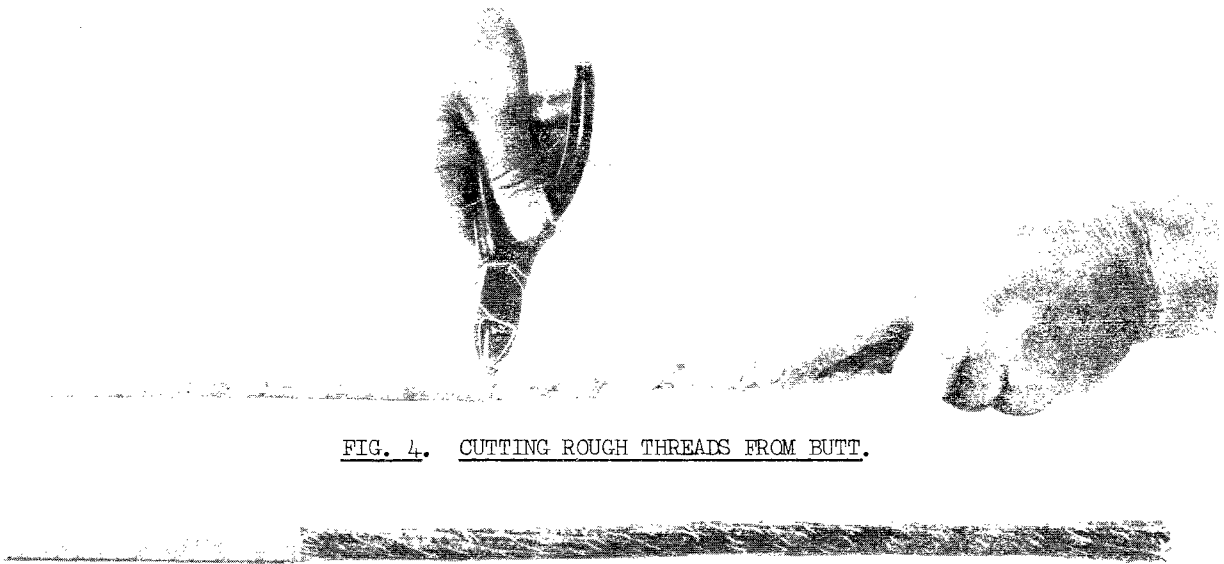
CUTTING ROUGH THREADS FROM BUTT.
